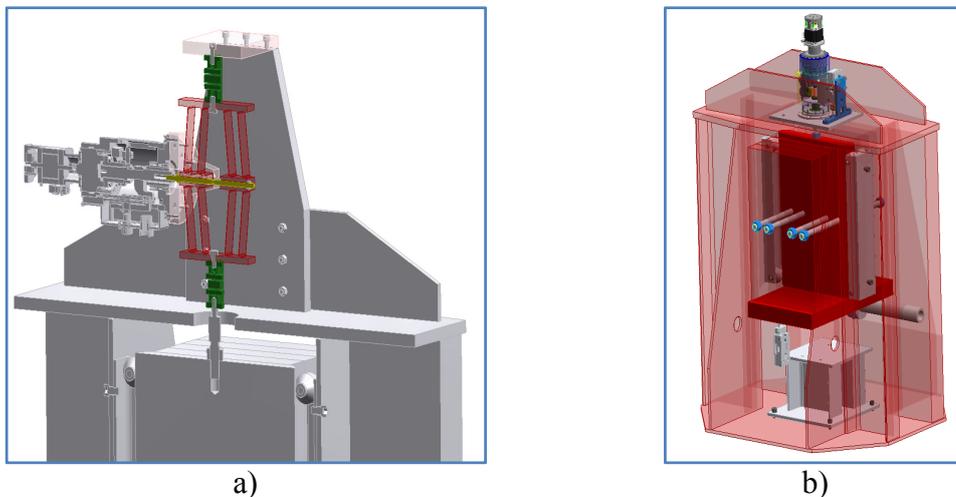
Model of stand a) with mechanical reductor, b) without reductor
